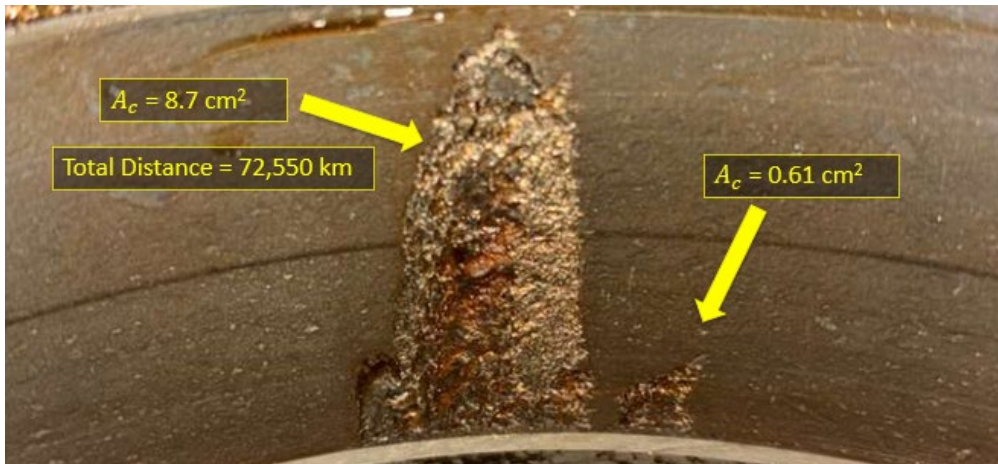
Inboard cup raceway spalls that developed during testing of the defective bearing
